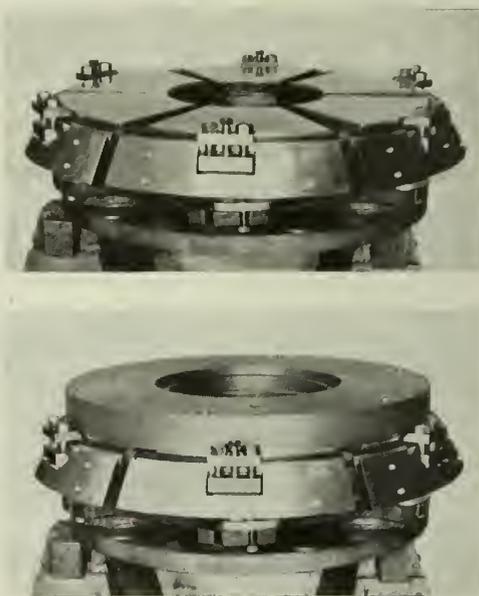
Kingsbury Thrust Bearing. Top—Without Runnerplate. Bottom—With Runnerplate.
